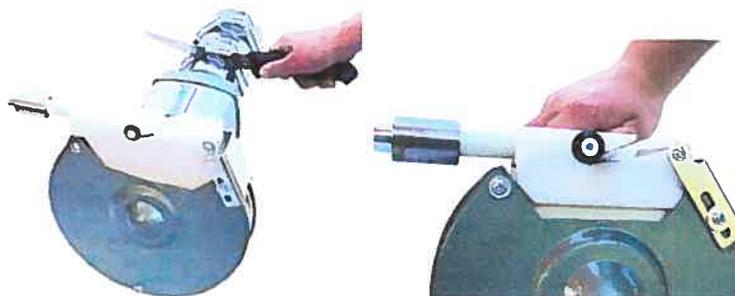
Machine SharpX Knife Sharpener.¹²⁷
